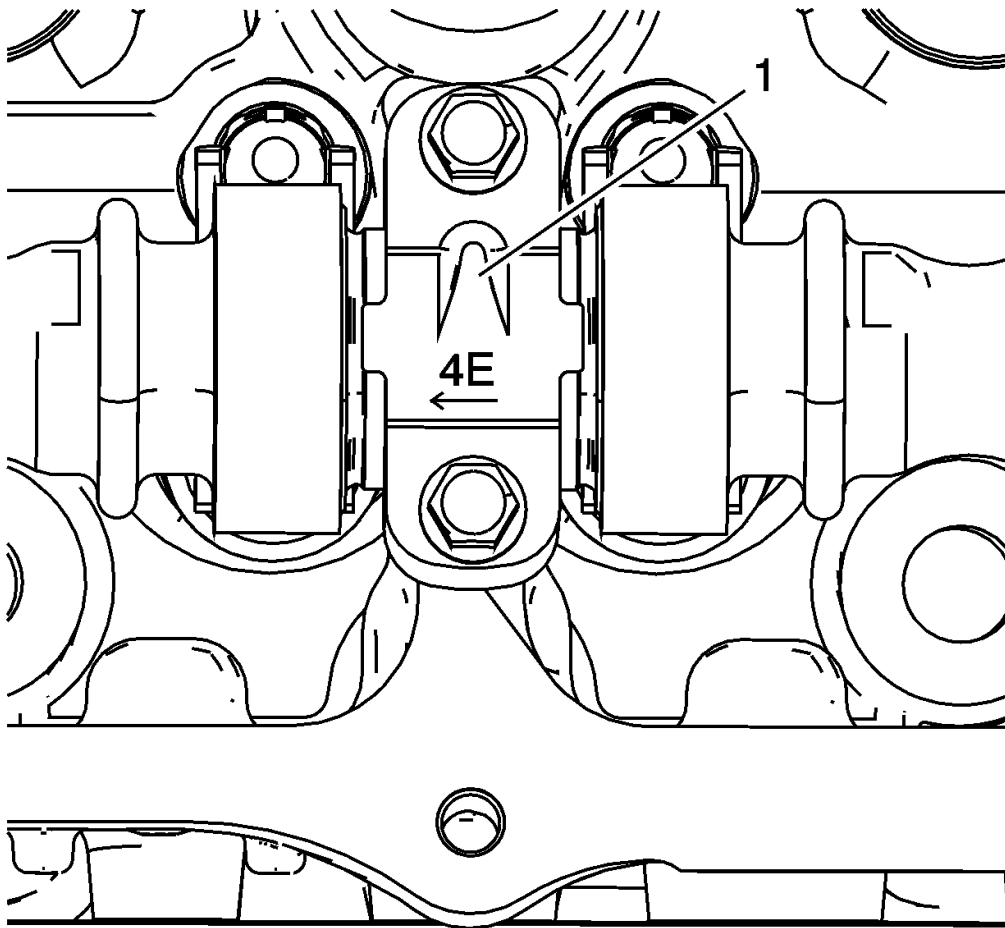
Left Cylinder Head Camshaft Bearing Cap Markings
